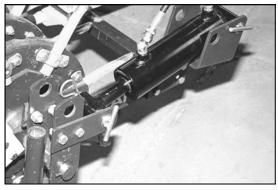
(For Tractors With 700 p.s.i. Hydraulics)
